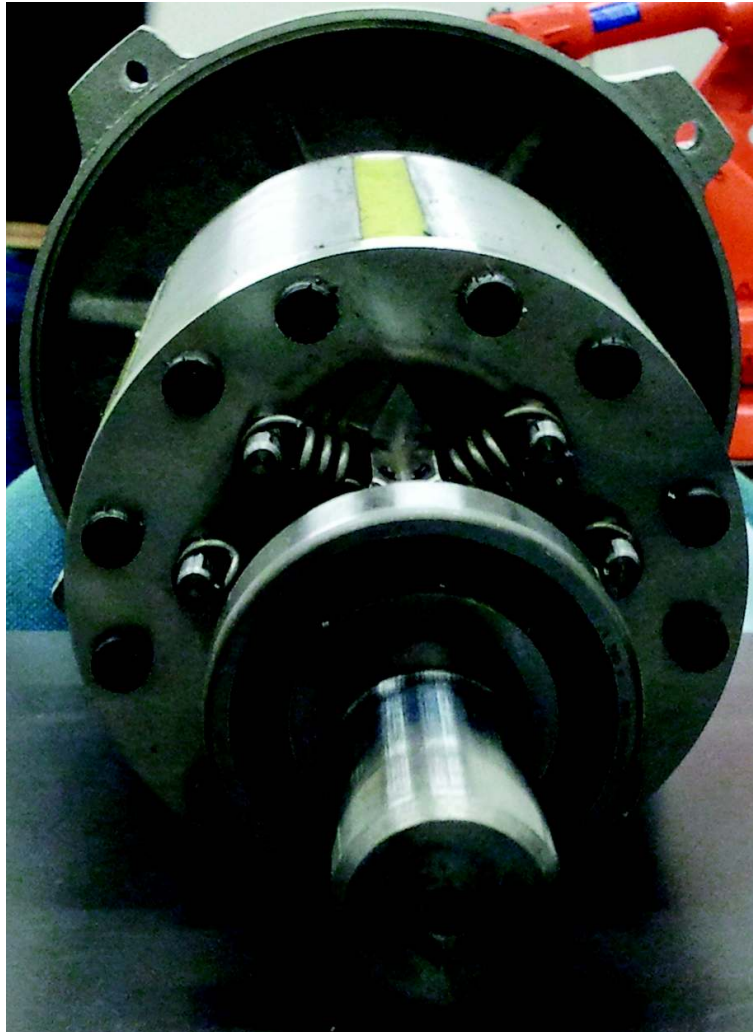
Picture of the rotor with the magnets inserted and the bearings and one shield mounted.
